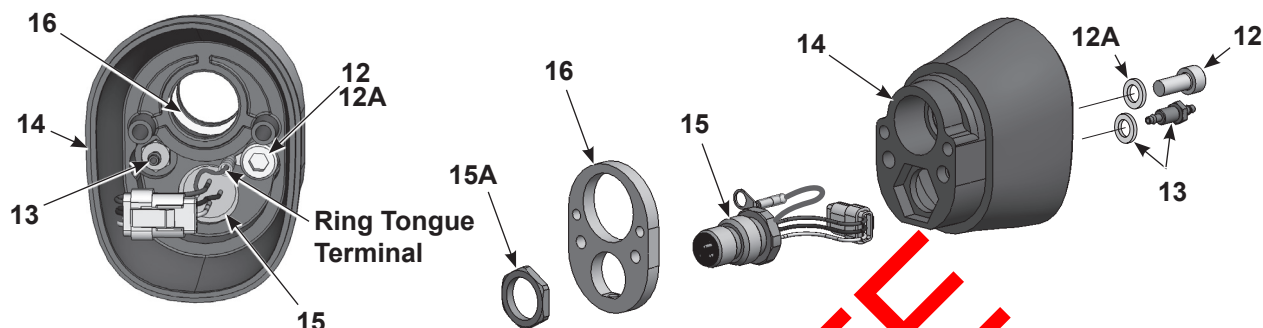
Tube-Mount Gun Disassembly 5 of 5
